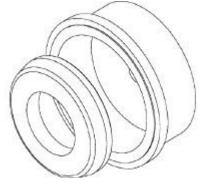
INSTALLER, SEAL - 8349 Courtesy of CHRYSLER LLC
